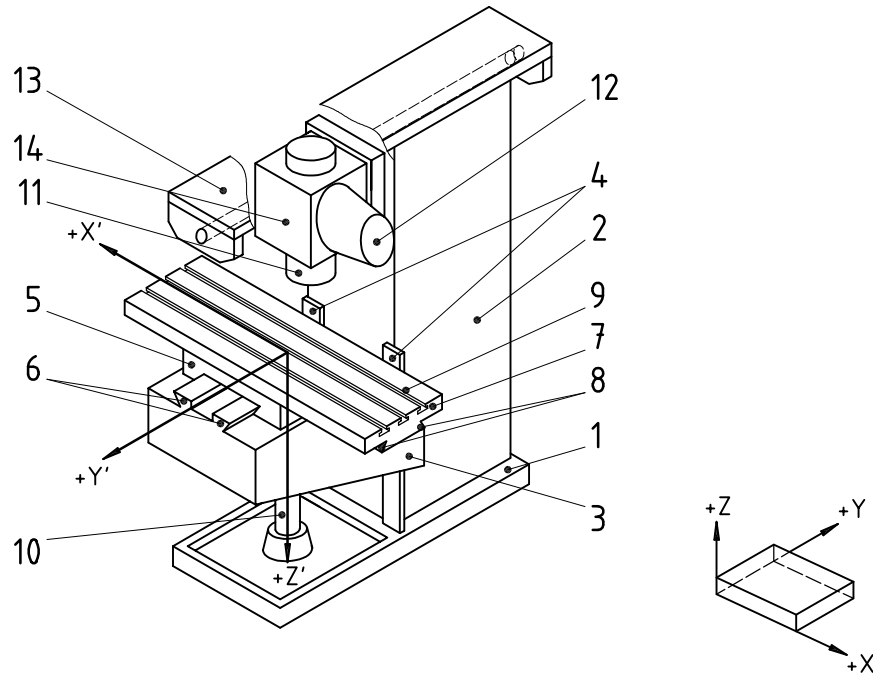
Milling machine with table of variable height, with a movable head, with horizontal or vertical spindle
